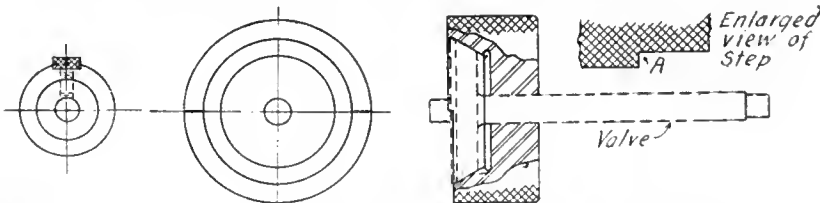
METHOD OF GAUGING VALVE SEAT.
